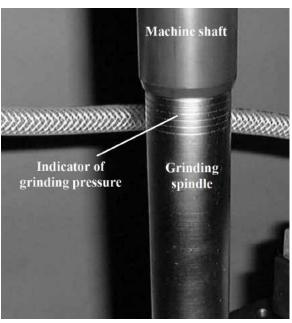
INDICATOR OF GRINDING PRESSURE
